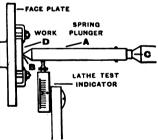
SETTING A CENTER PUNCH MARK TRUE TO AXIS OF ROTATION WITH LATHE INDICATOR.
